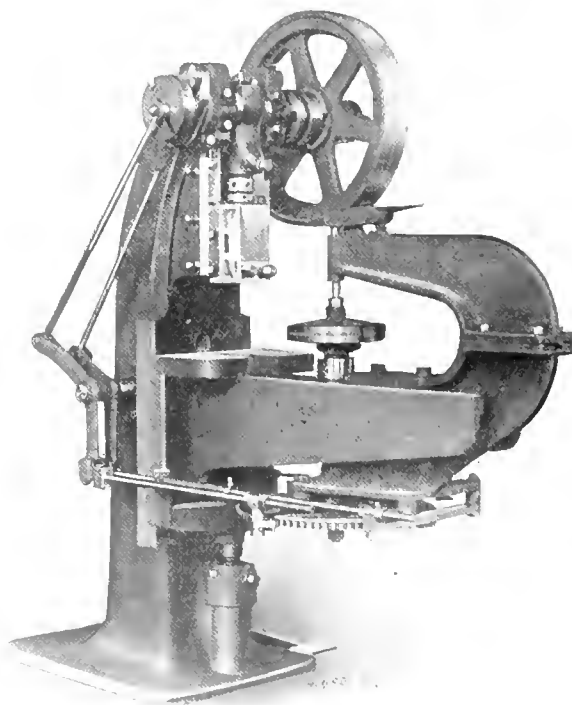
Zeh & Hahnemann Armature Notching Machine.
